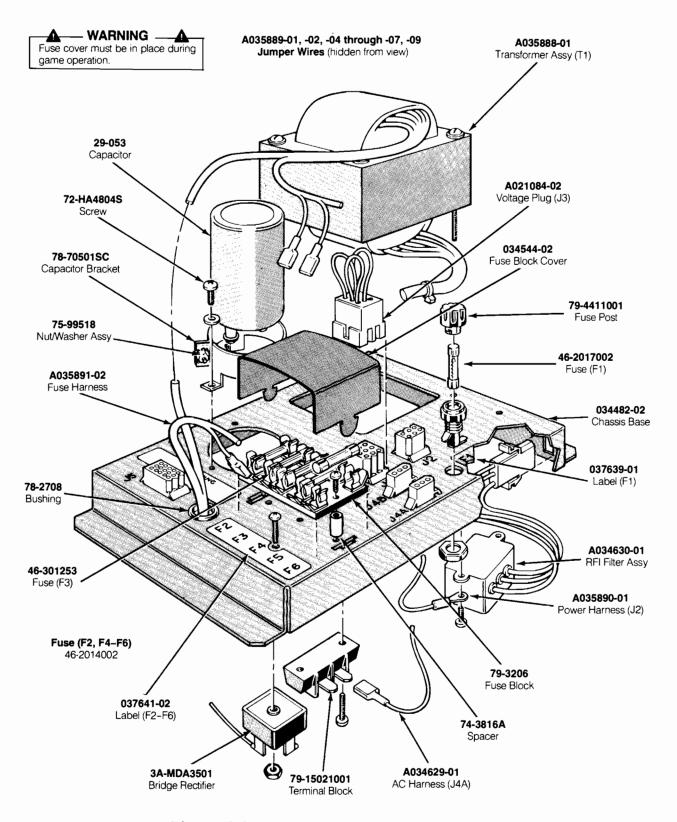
Linear Power Supply Assembly A037671-18 N
